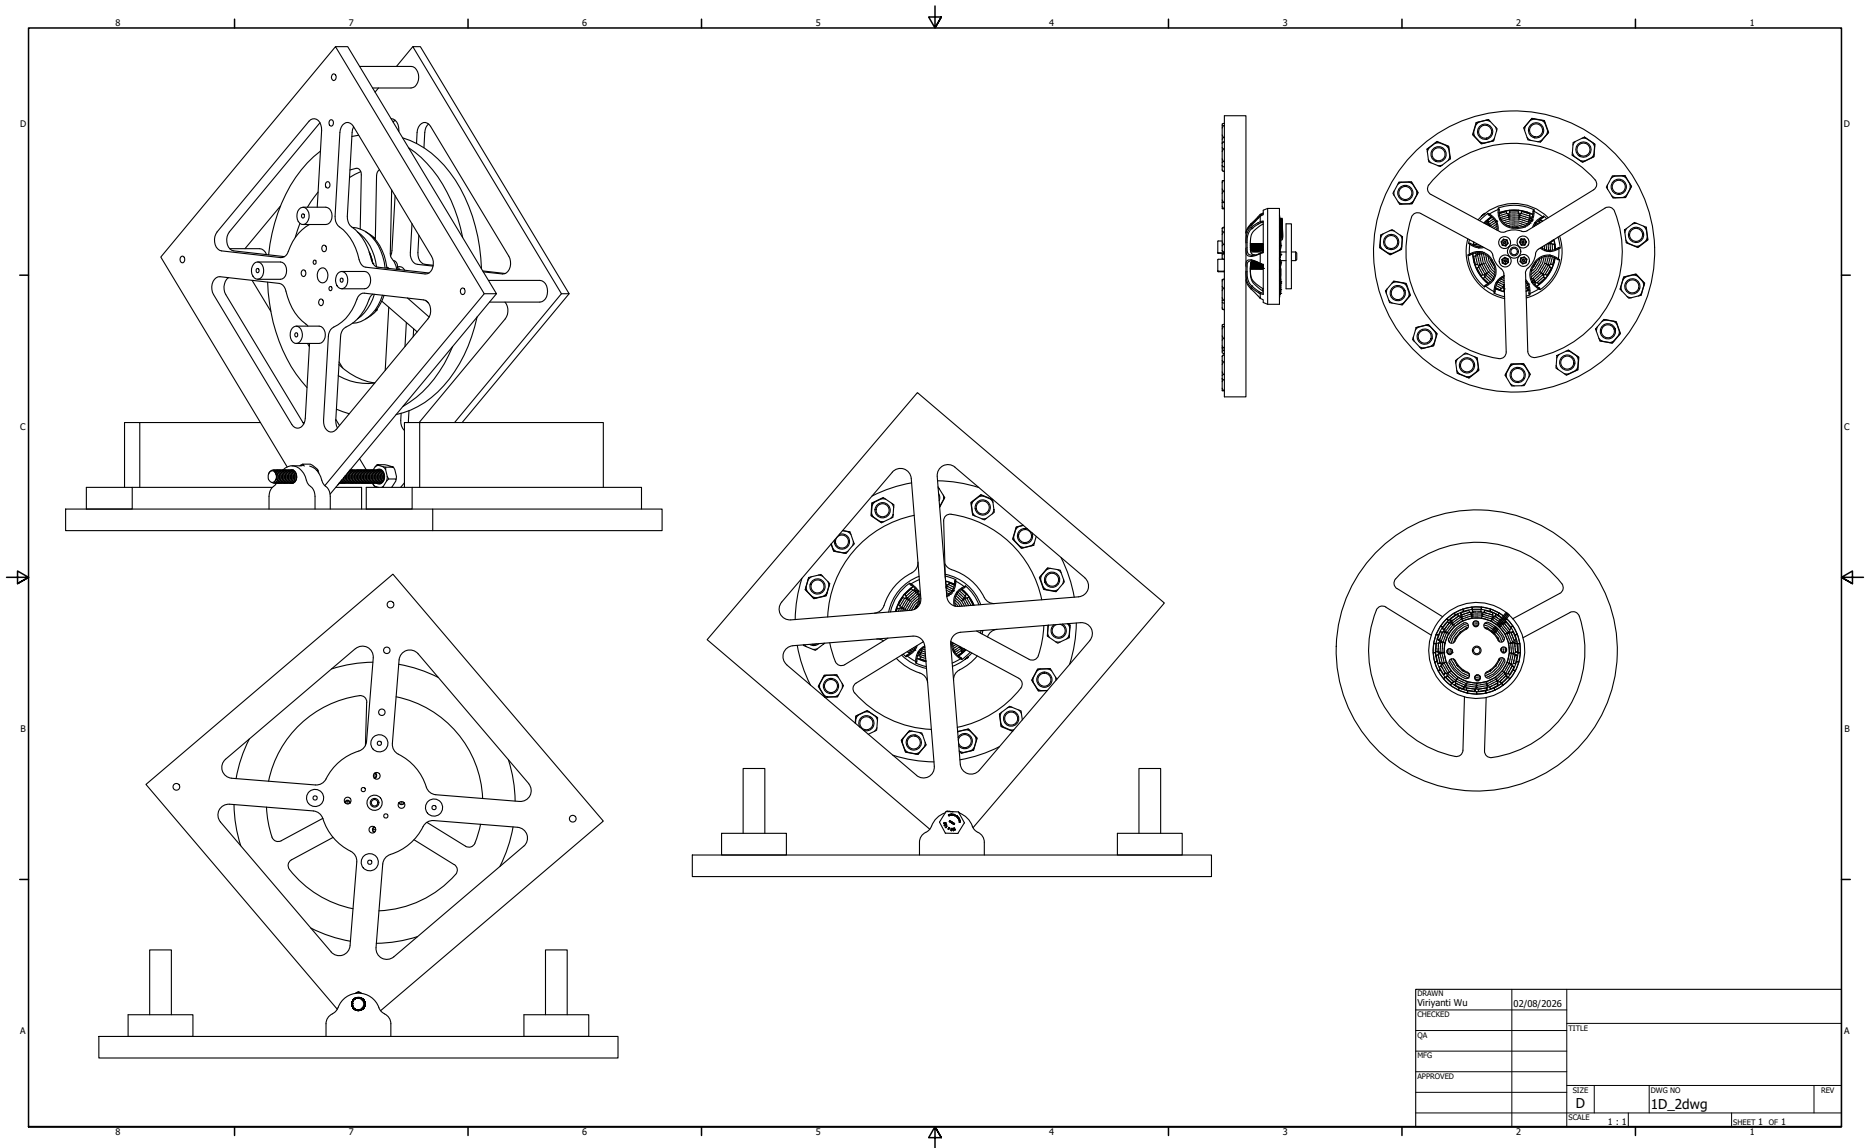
General-assembly drawing of the 1-DoF prototype rig — the final released design of the single-axis article — sheet 1 of 1 at 1:1. Upper left and lower left: front elevation of the rig mounted on its base, showing the diagonal plate orientation, the corner pivot and the two hard stops. Centre: side elevation through the wheel axis. Right: plan and edge views of the reaction-wheel and motor assembly, giving the spoke pattern and the ballast bolt circle used for the balancing adjustment of Section 5.3.
